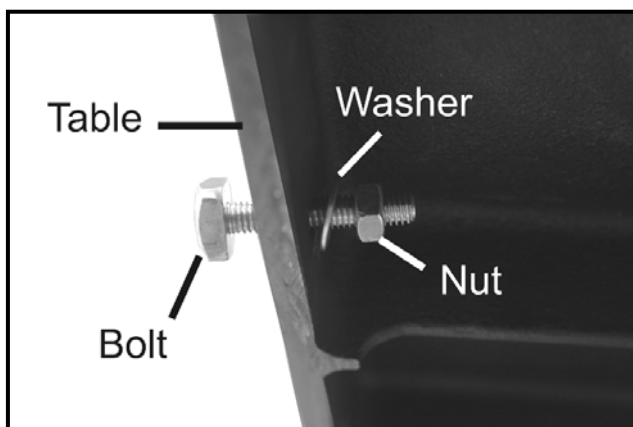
Nut and bolt to secure the front fence rail to the table and wings
